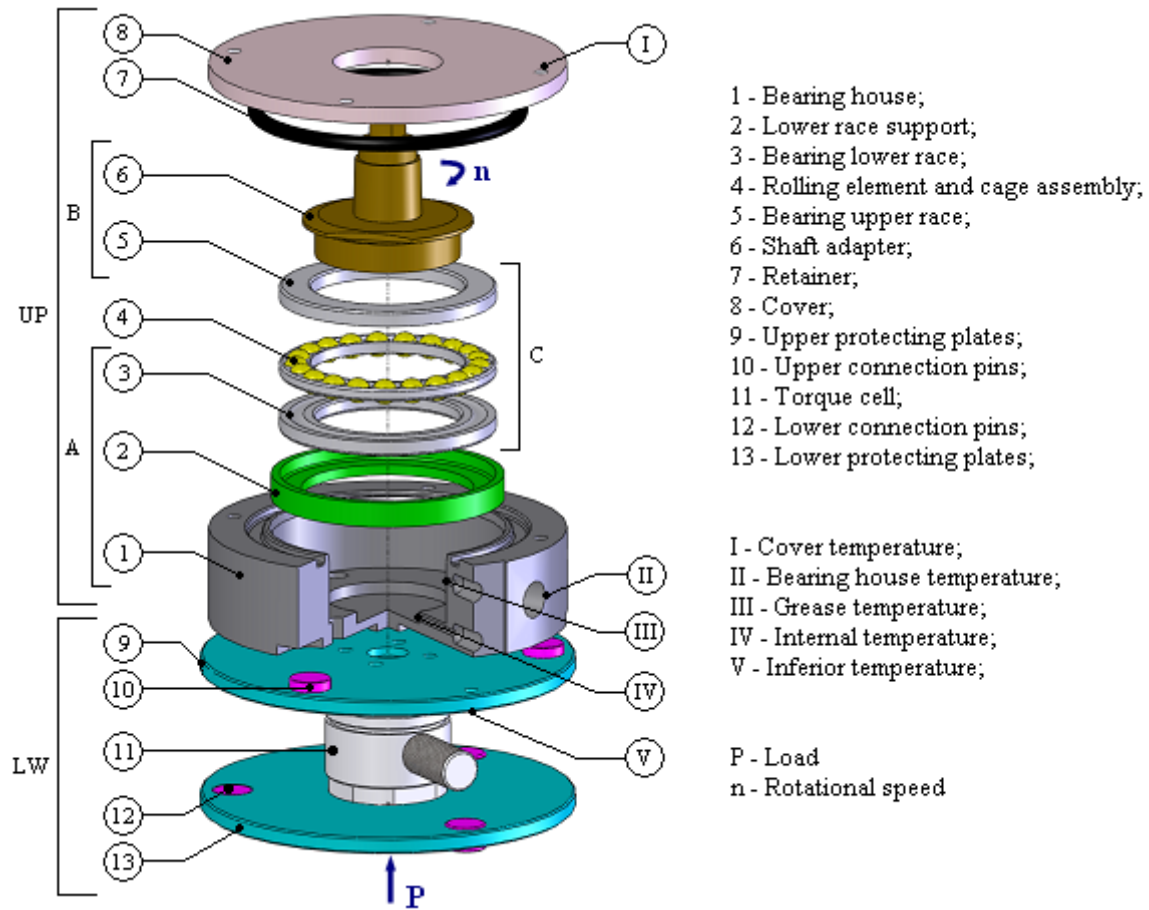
Schematic view of the rolling bearing assembly with a THBB 51107.
